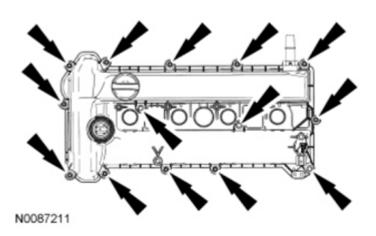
Locating Bolts And Valve Cover Courtesy of FORD MOTOR CO.
